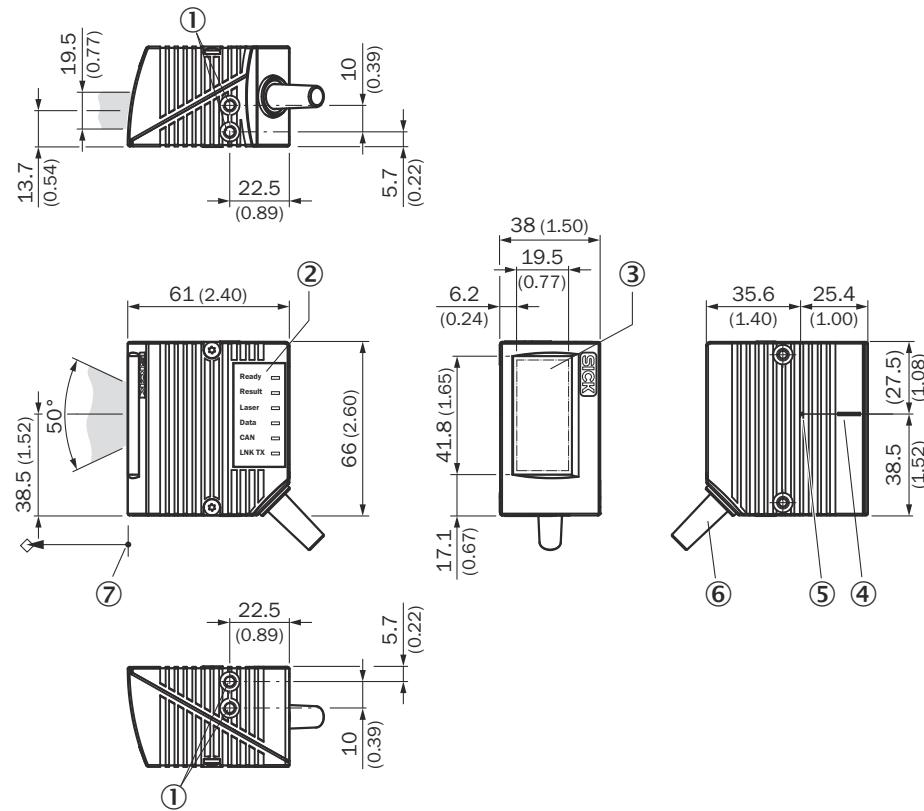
CLV62x in IP65 standard housing with front viewing window and connecting cable: Structure and device dimensions, unit of measurement: mm (inch), decimal separator: Period
